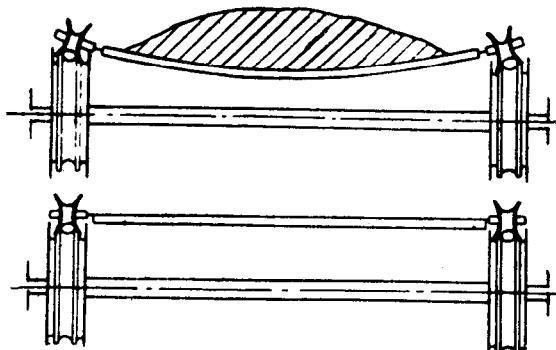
CHAIN OR WIRE ROPE BELT CONVEYOR
